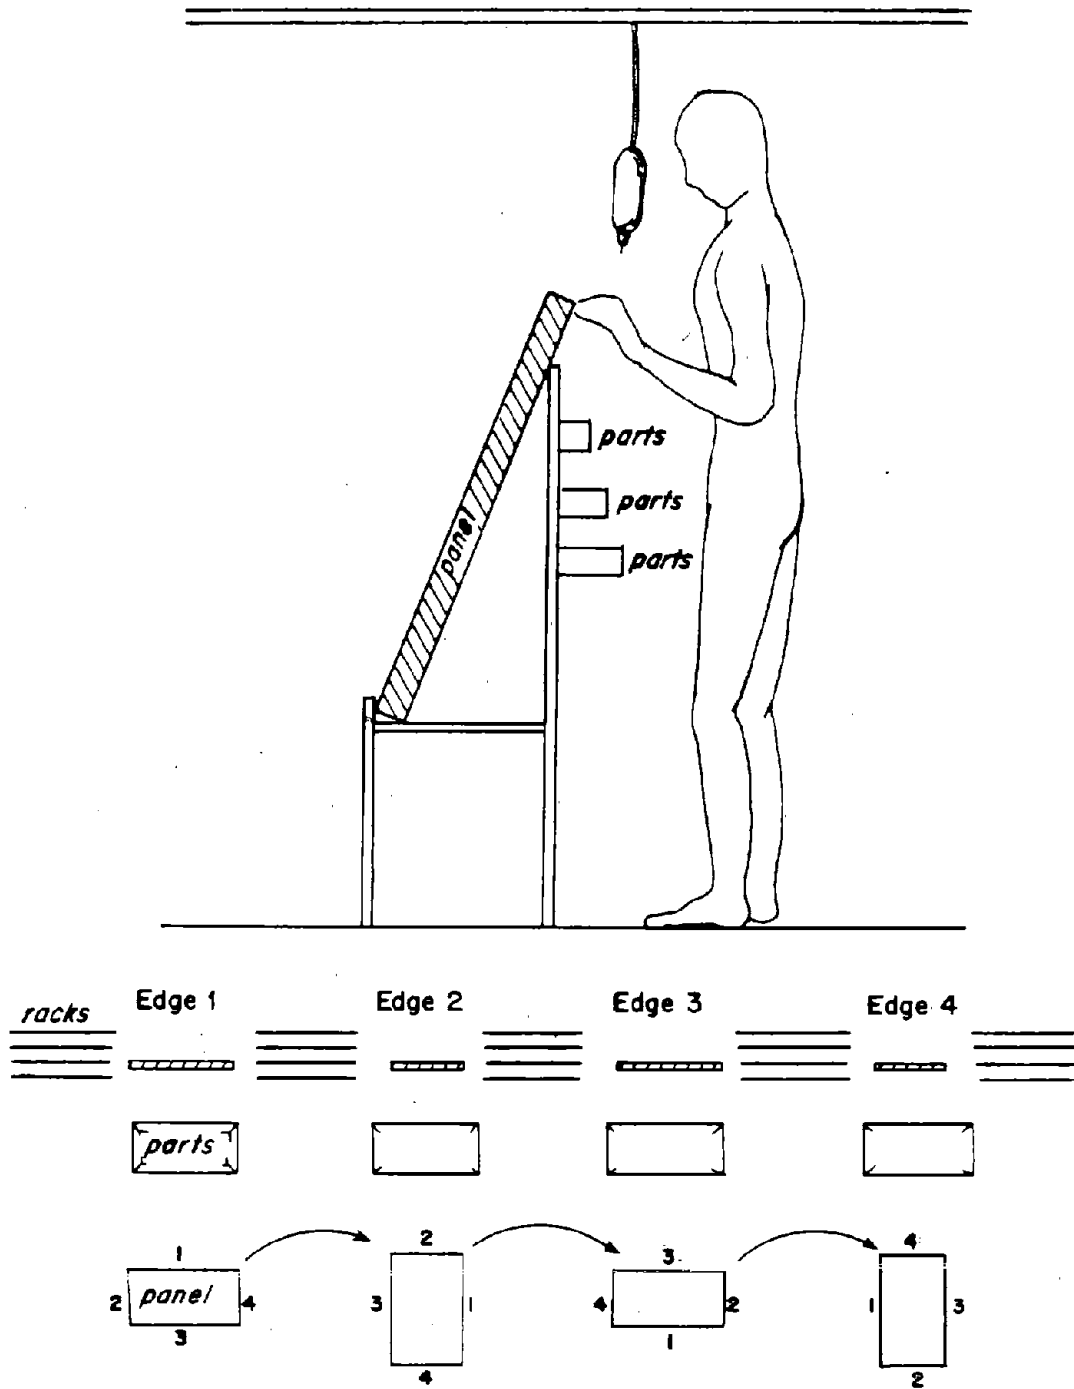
Possible jig arrangement to hold panels for attachment of edge hardware. A screwdriver is suspended over head and parts are stored underneath the panel.
